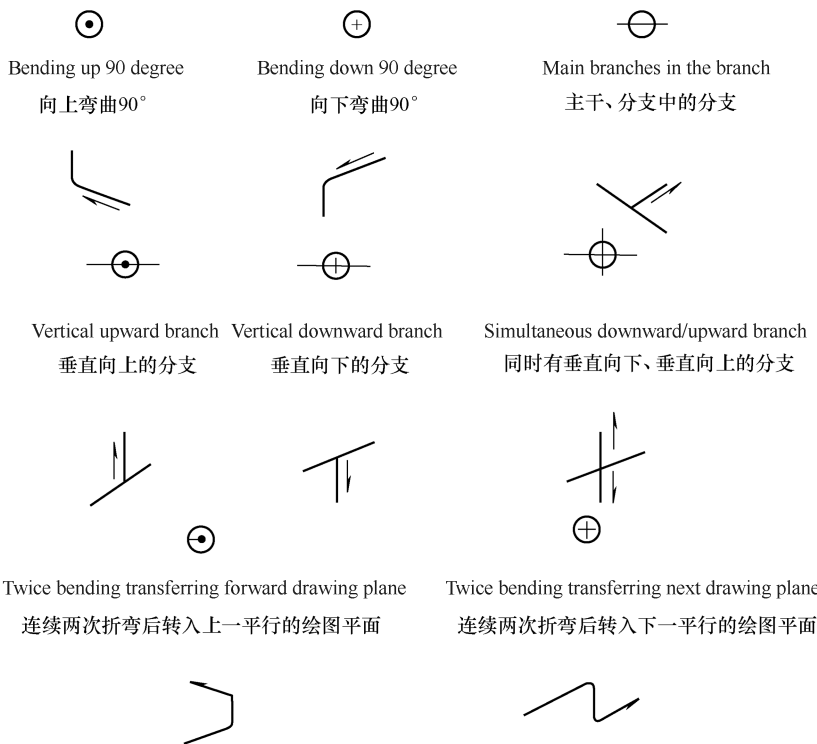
Wiring-drawing Symbol 接线扎符号
